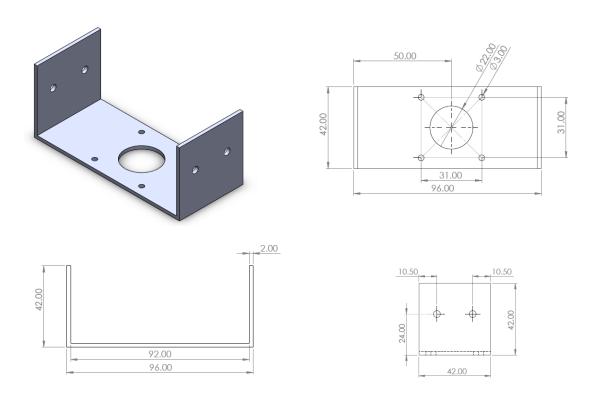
CAD Model and dimensions of Arm 2 motor mount clamp
